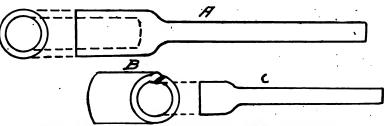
MAKING A SOCKETED END ON A SOLID ROD
